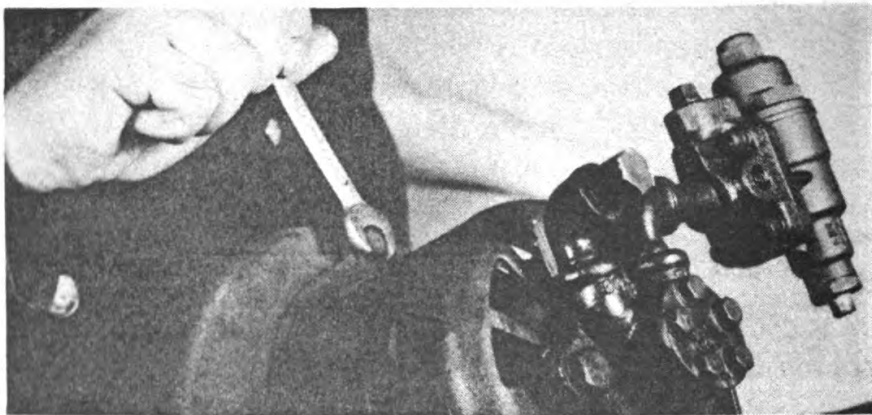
Removing Bolts Holding Guard and Pump Assembly to Fan Housing.
